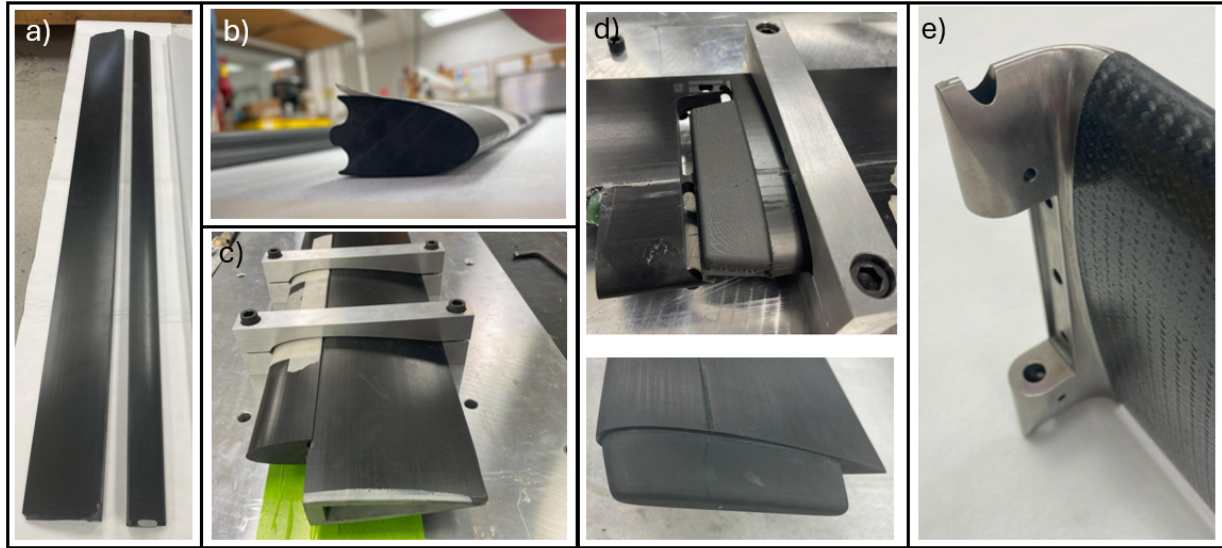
(a) Trailing and leading edges of the uniaxial core after being removed from the molds. (b) A leading edge showing the machined surface that mates with the trailing edge. (c) A full foil clamped while the adhesive cures. (d) Machined tapers prior to installing the hinges. (e). Fabricated foil after wrapping the core and installing the hinges.
